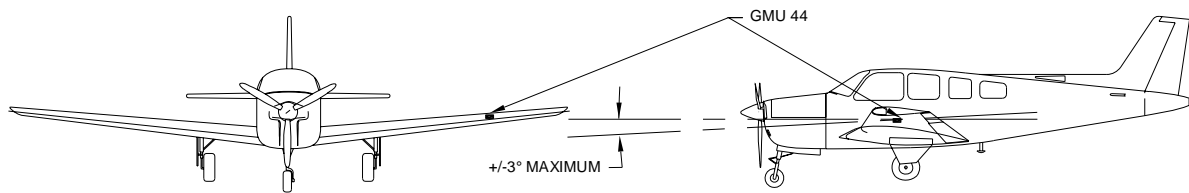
Level Mounting of GMU 44 Magnetometer
